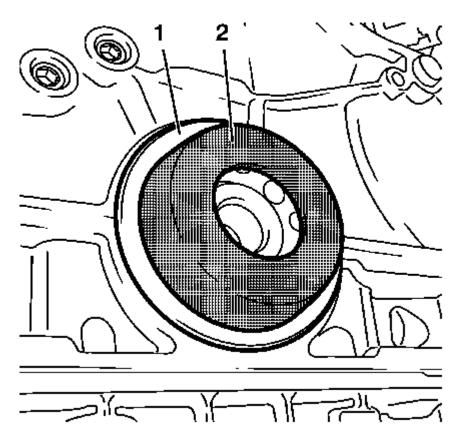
Crankshaft Rear Oil Seal Removal Tools Courtesy of GENERAL MOTORS COMPANY
